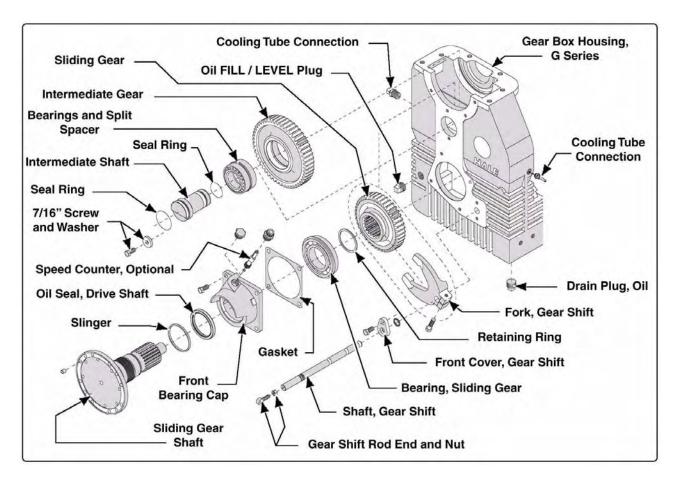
1: Intermediate Shaft and Sliding Gear, Typical G Series Gearbox
